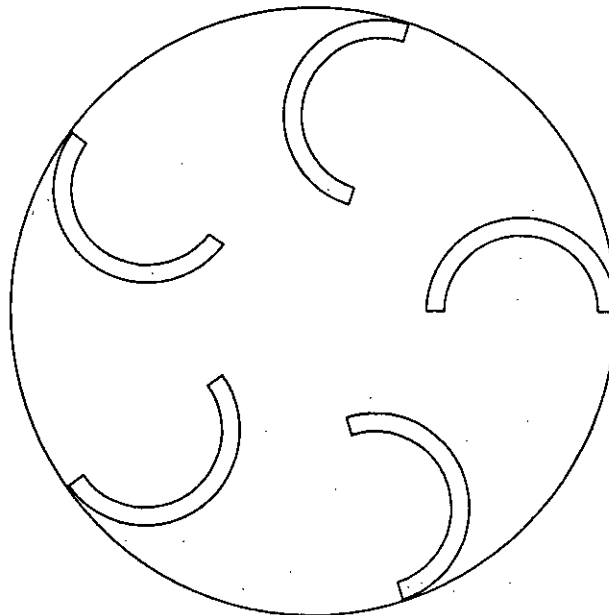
(b): Sectional view of five bladed vertical axis vane type rotor.
